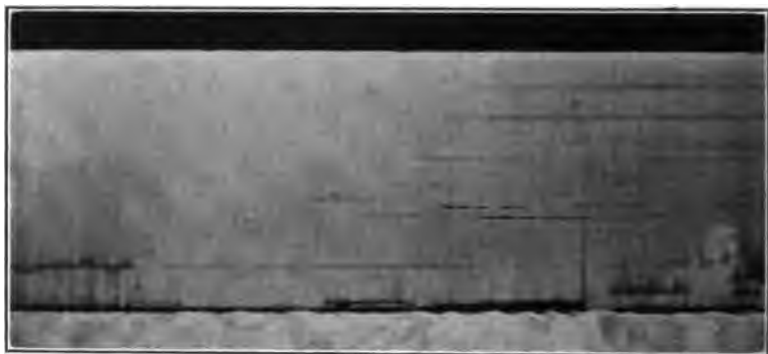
HEAD OF STEEL RAIL, PLANED DOWN, SHOWING A SHORT SPLIT ON THE LINE OF A LONGITUDINAL STREAK.
